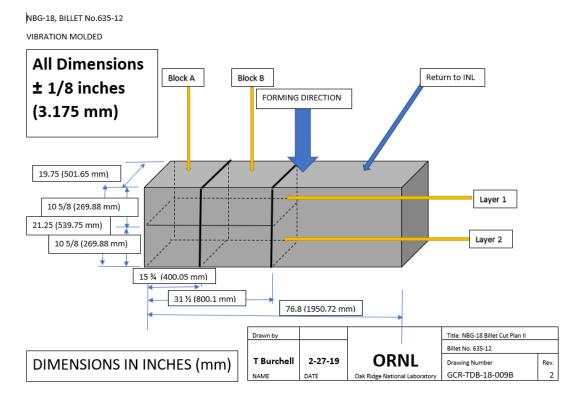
NBG-18 billet no. 635-12 cut plan (drawing B).
